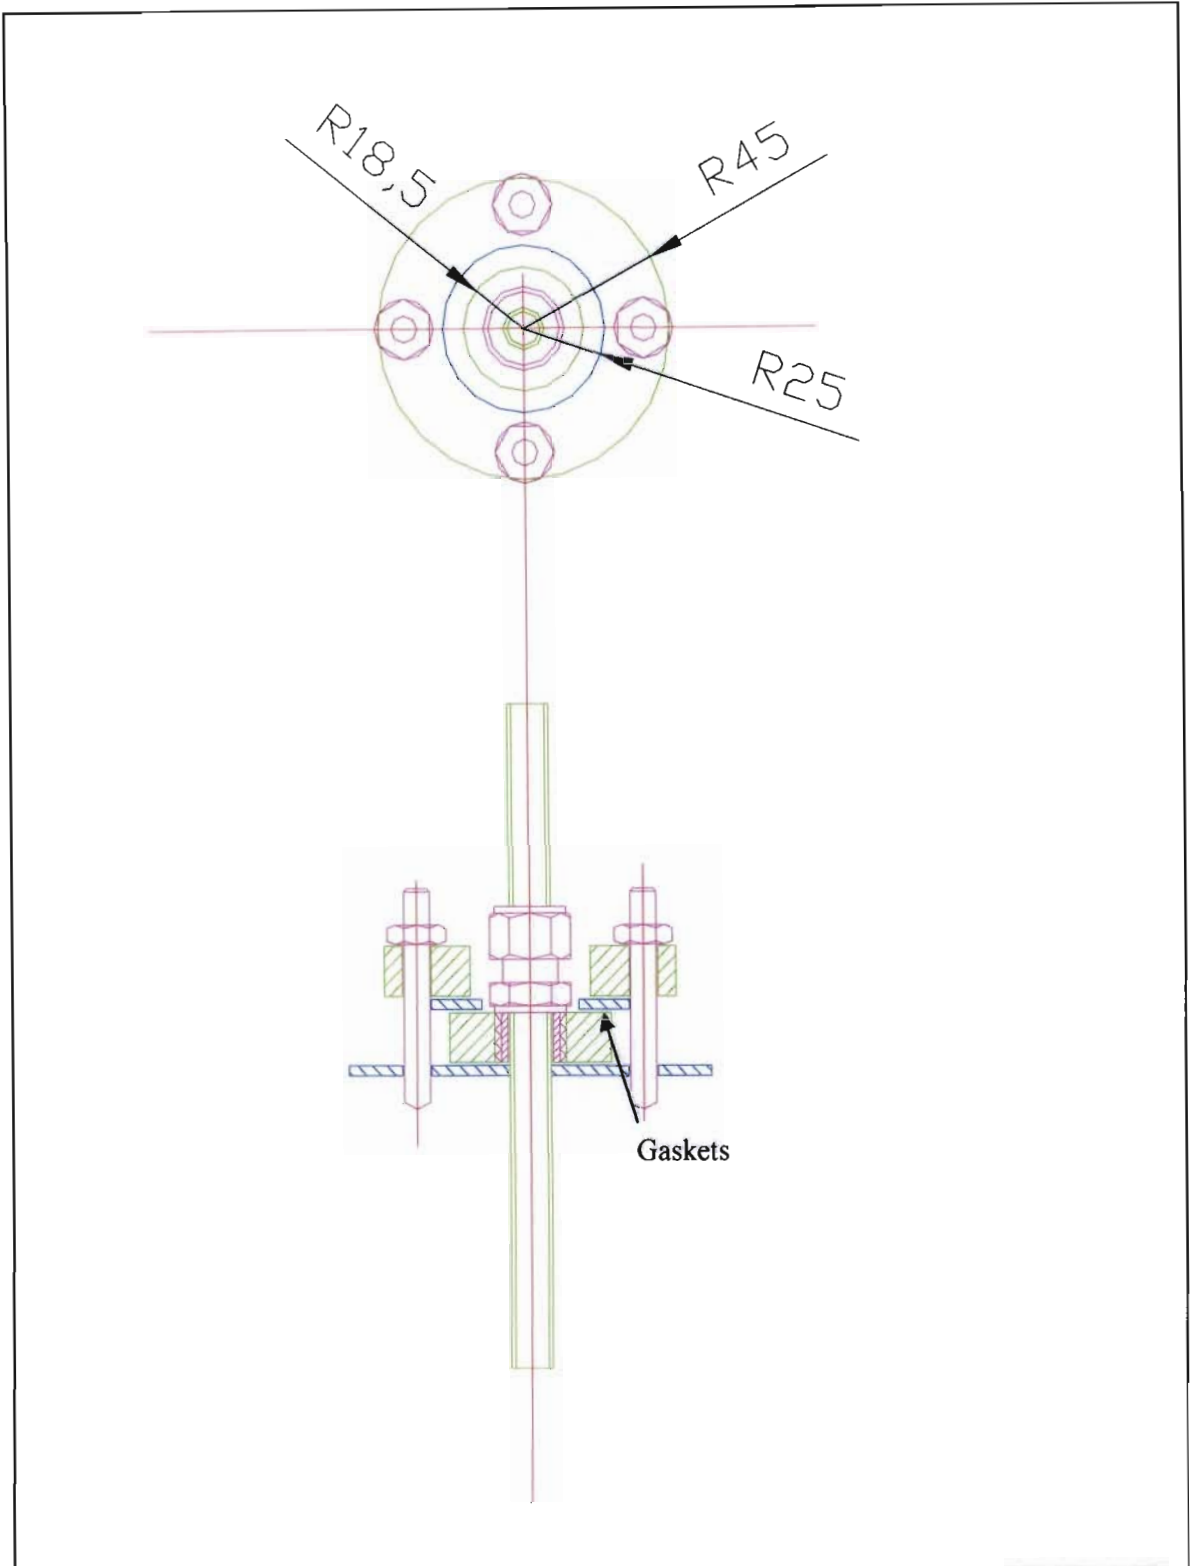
Drawing Design of the Ends of Convoluted Heat Transfer Pipes
